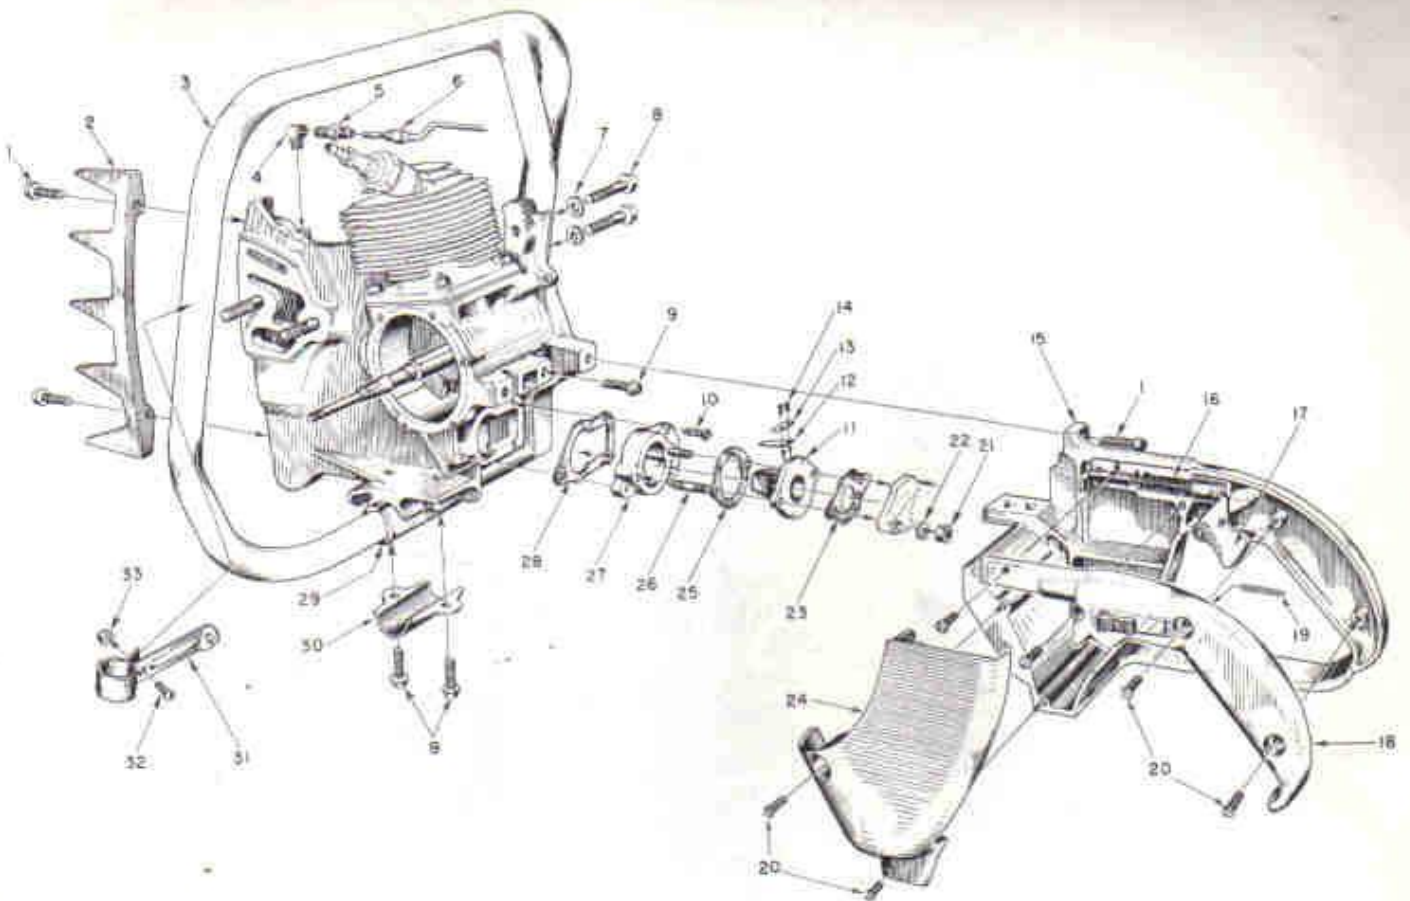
HANDLE, GRIP AND REED VALVE PARTS
